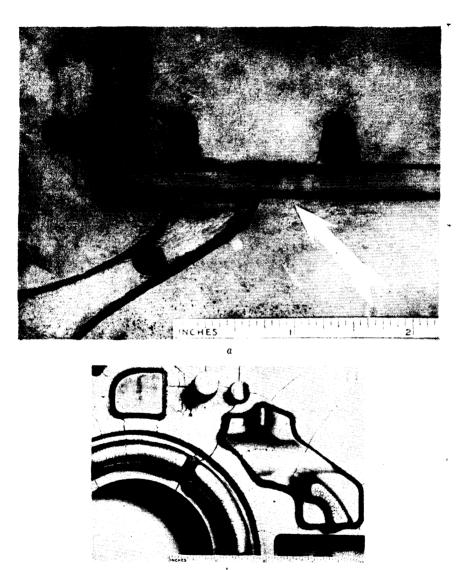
Two degrees of heat checking on dies for casting aluminum: a, fine heat checks; b, coarse heat checks and cleavage cracks. In both cases the dies had to be replaced.
